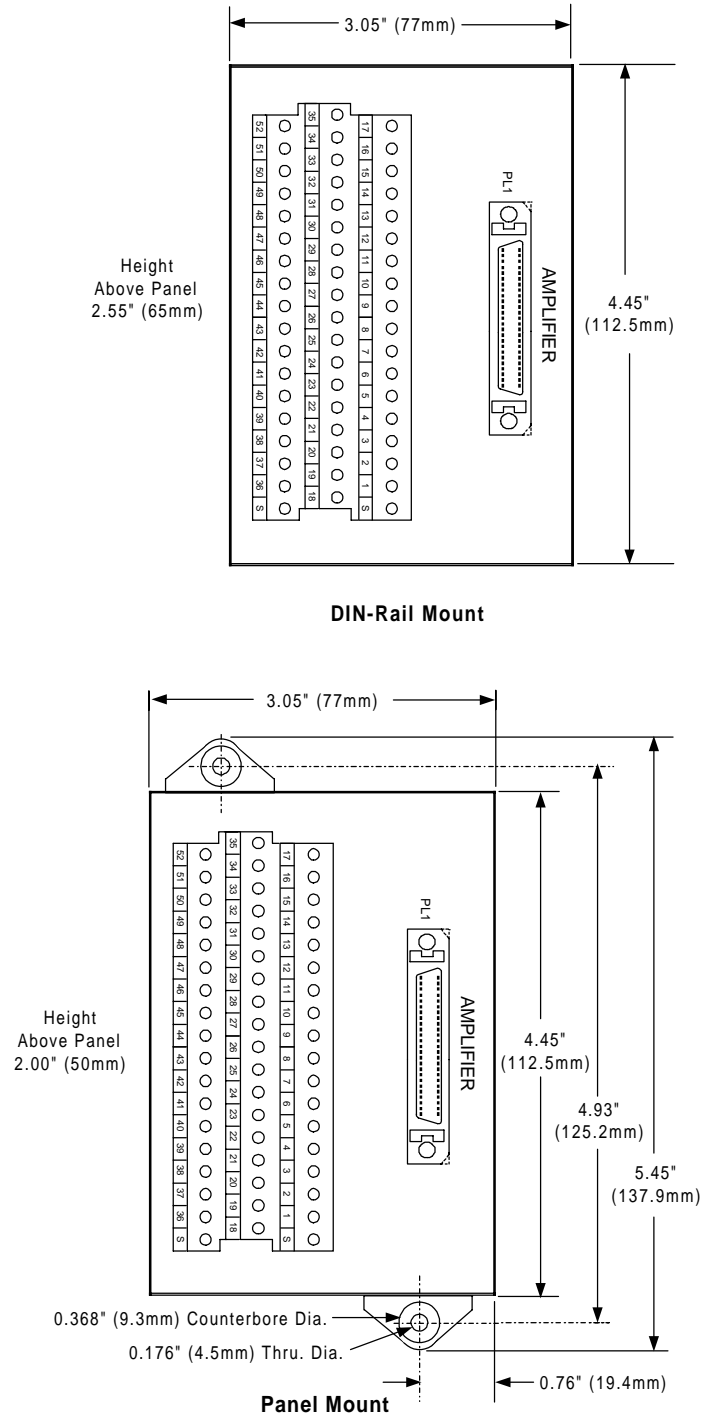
IC800SLT004 Breakout Terminal Board Mounting Dimensions
